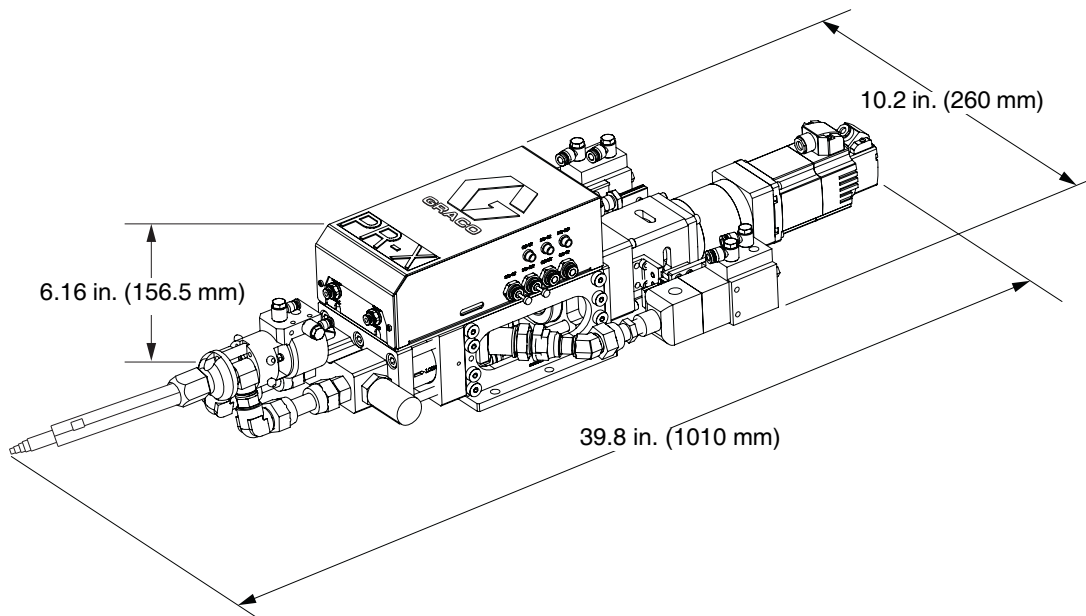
PR-X Machine Dimensions, Supply Pump Feed
